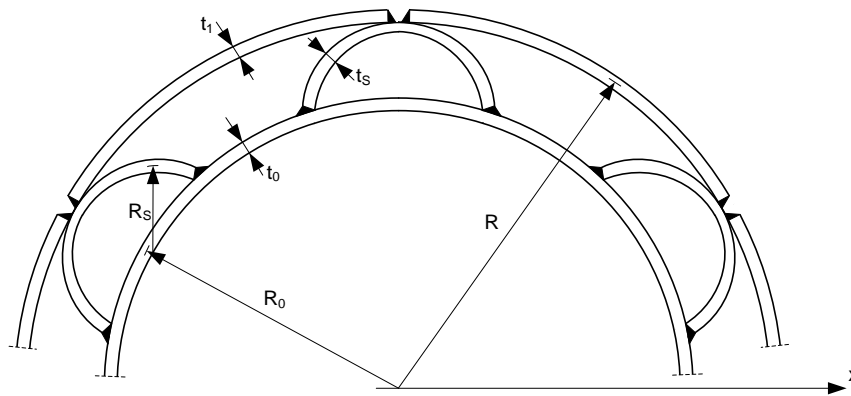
A part of the cross-section of the cellular plated wall with welded T-stiffeners
